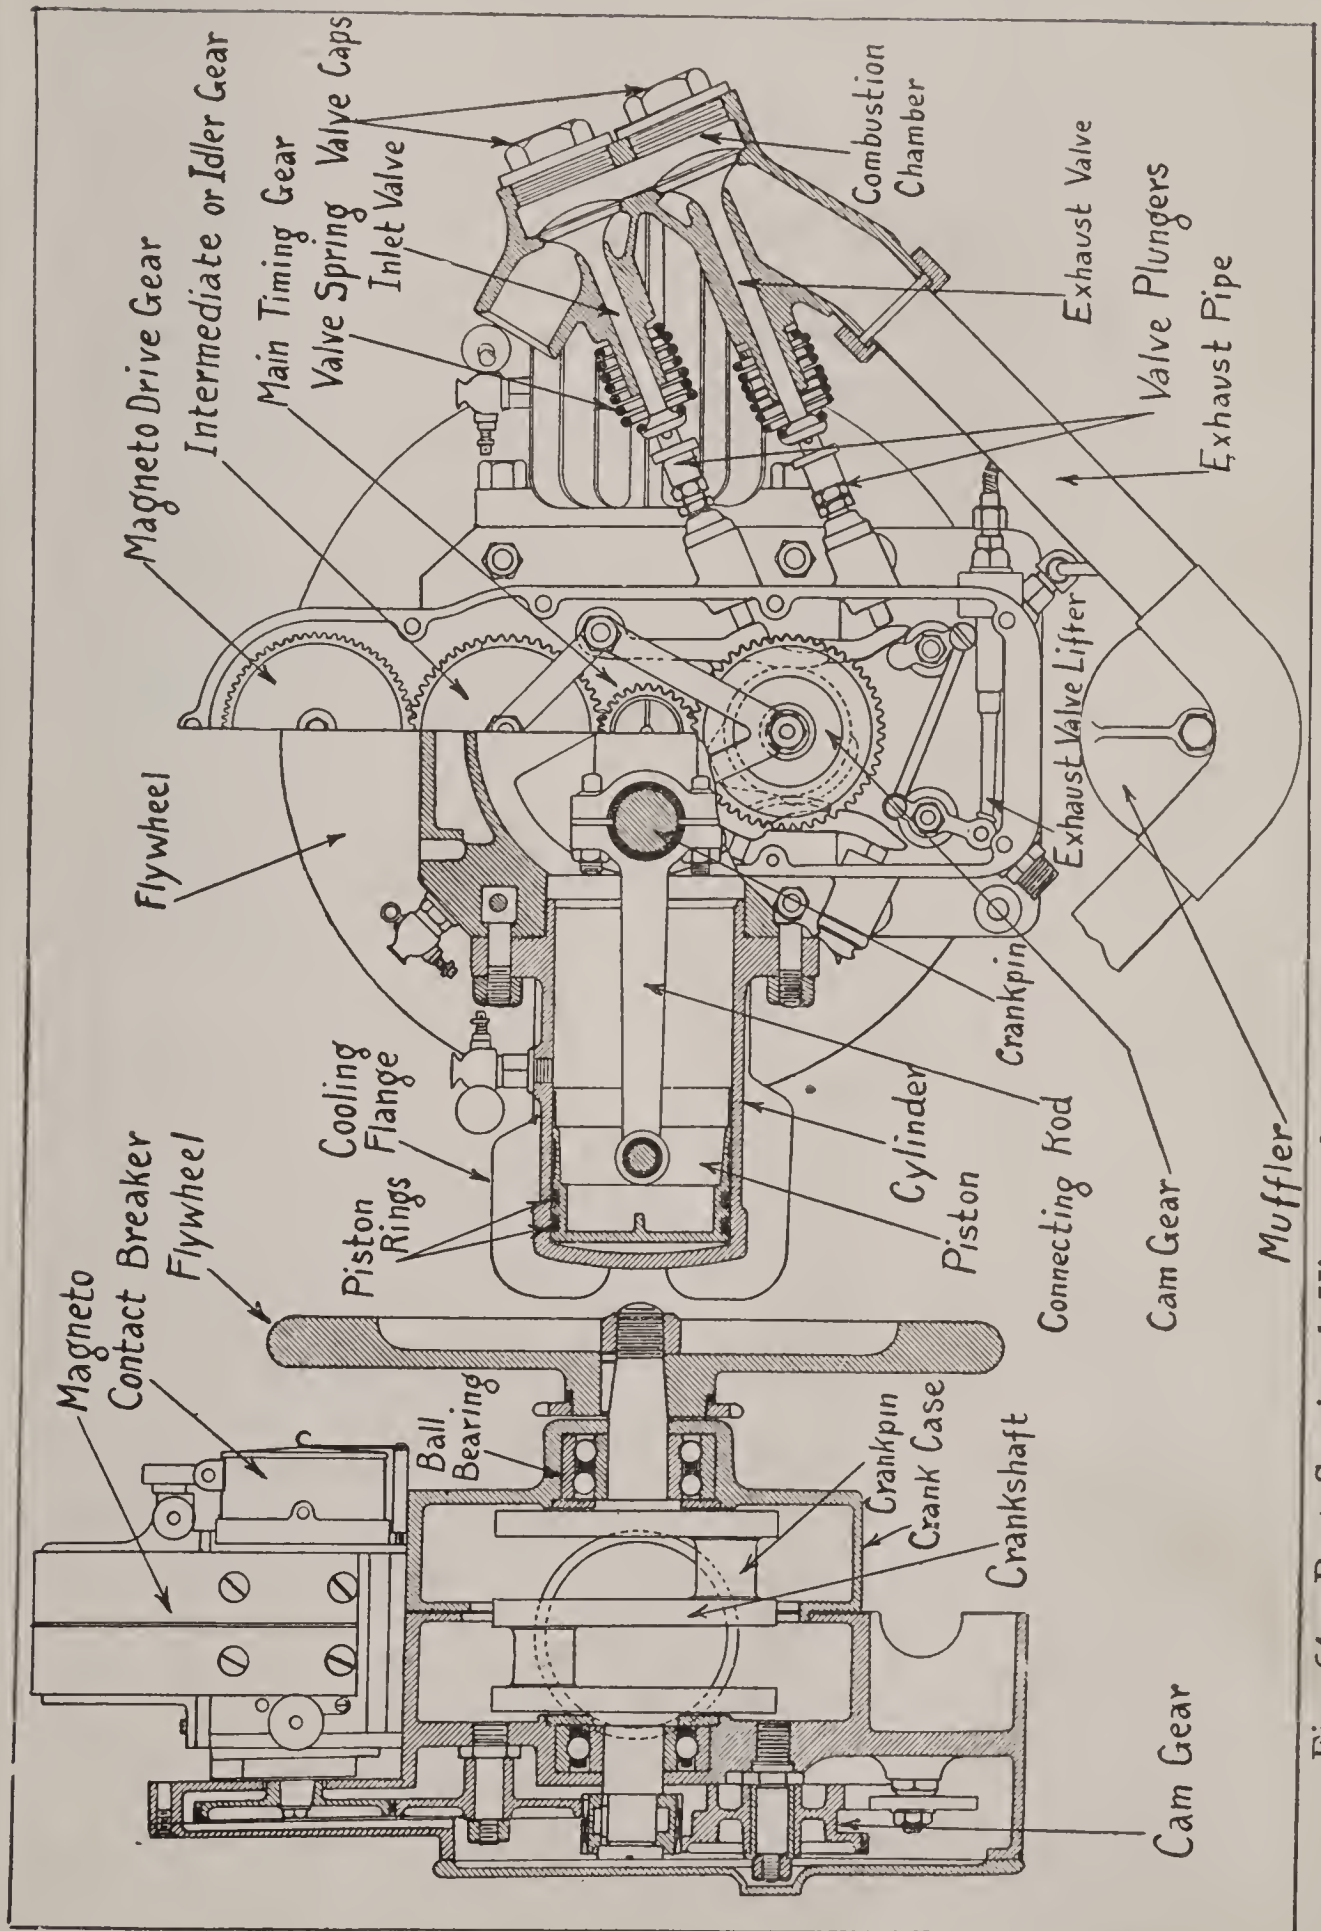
Part Sectional Views of the Douglass Opposed Cylinder Motorcycle Motor.
